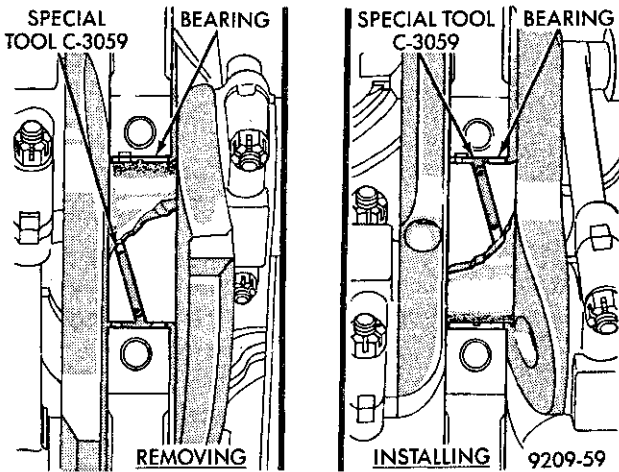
Upper Main Bearing Removal and Installation with Tool C-3059
